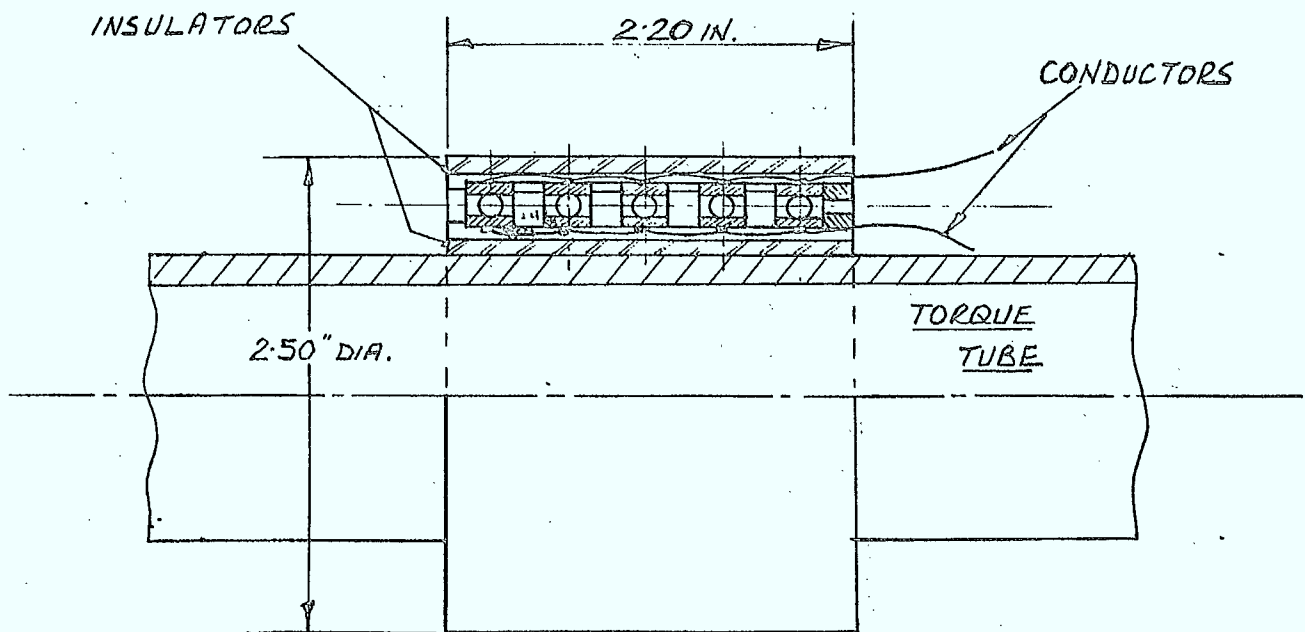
SHOWING BASIC DESIGN OF DEVICE USING BEARINGS TO TRANSFER POWER
